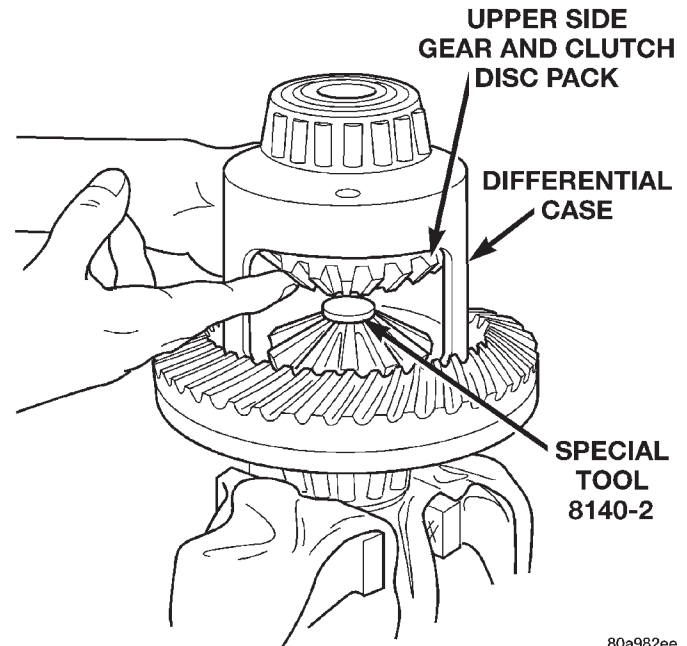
Upper Side Gear & Clutch Disc Pack Installation
